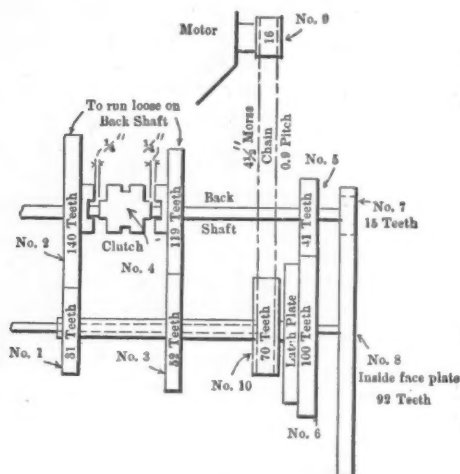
ARRANGEMENT OF GEARING UPON A 42-IN. NILES TRIPLE-GEARED LATHE.
